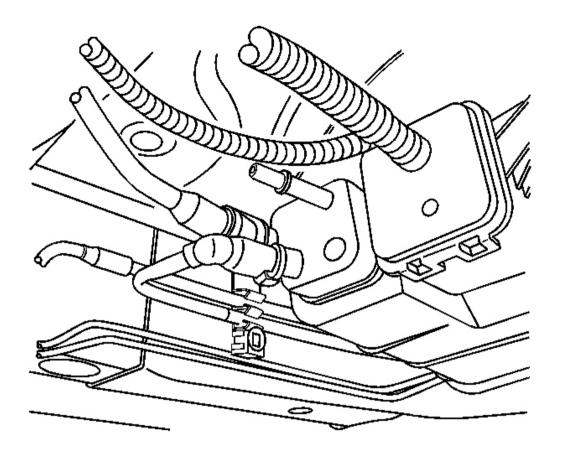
View Of EVAP Vent & Fresh Air Hoses Courtesy of GENERAL MOTORS CORP.
